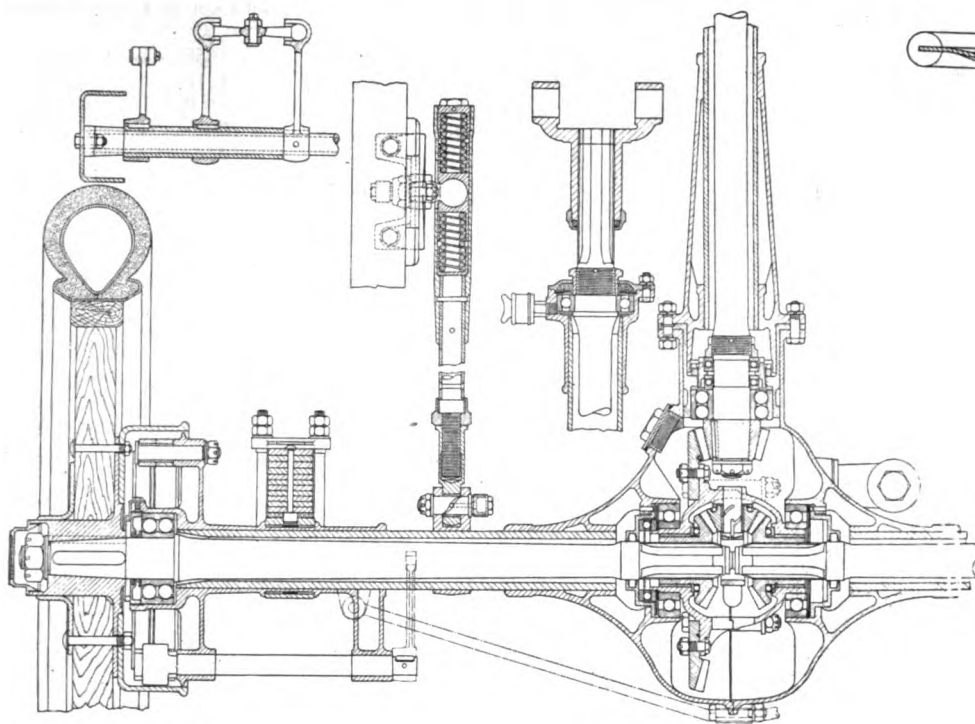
Horizontal section through rear axle, propeller shaft, torque tube and radius rod. Brake equalizer is shown in upper left corner
